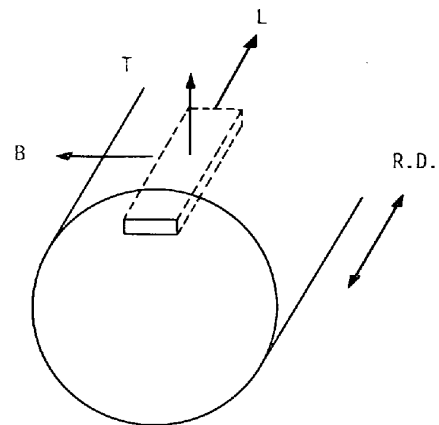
Sampling method of test piece for the measurement of texture of billet.
